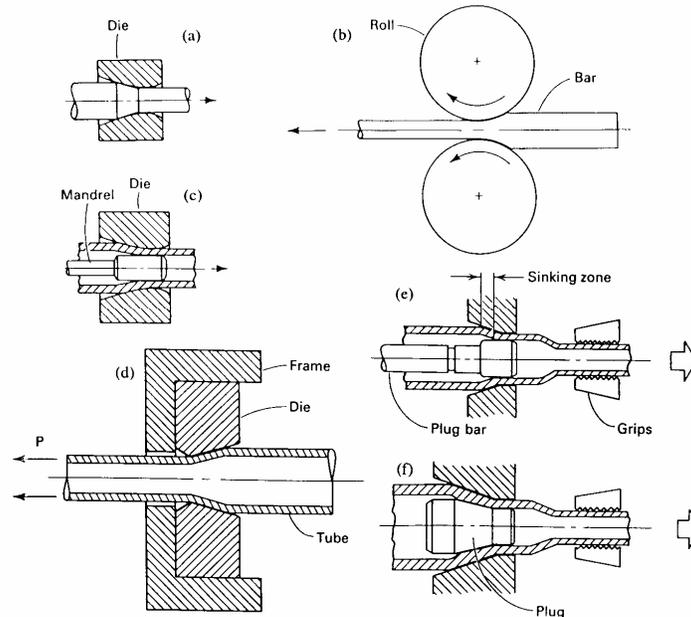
Schematic examples of some drawing methods: (a)—wire drawing, (b)—bar drawing with undriven rolls, (c), (d), (e), and (f)—tube drawing. View (d) shows drawing without any mandrel, (e) with fixed plug, and (f) with floating plug if a fixed plug will stretch or break.²⁵
